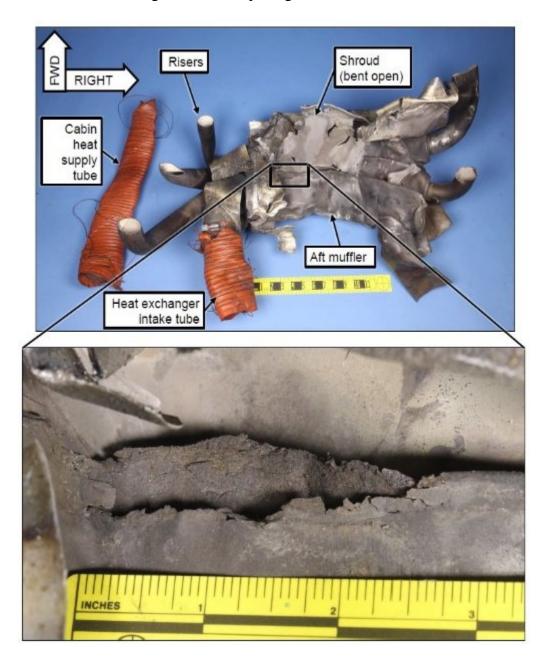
Overall view of the muffler assembly with a closer view of an open crack at the upper forward side of the aft muffler (lower image)
